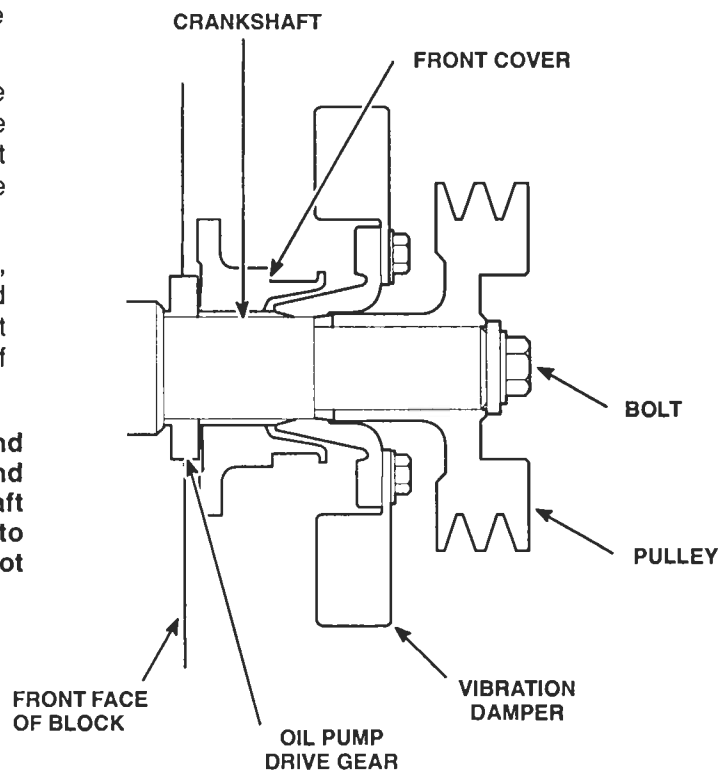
Vibration Damper and Crankshaft Pulley Mounting
